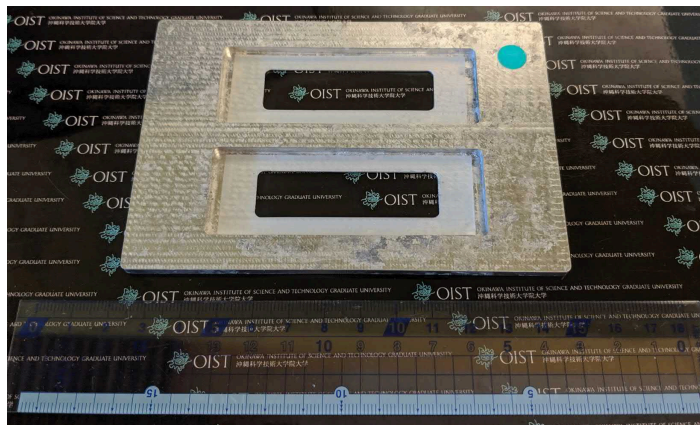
The CNC milled custom holder for Tokai Hit WKSM incubator.
